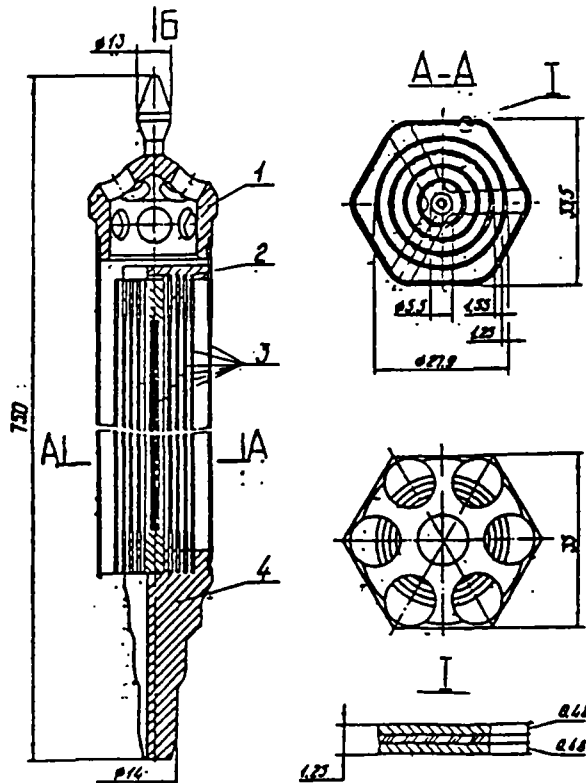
Fuel assembly of the WWR-M reactor; 1 – cap; 2 – upper grid; 3 – fuel elements; 4 – ending part.
